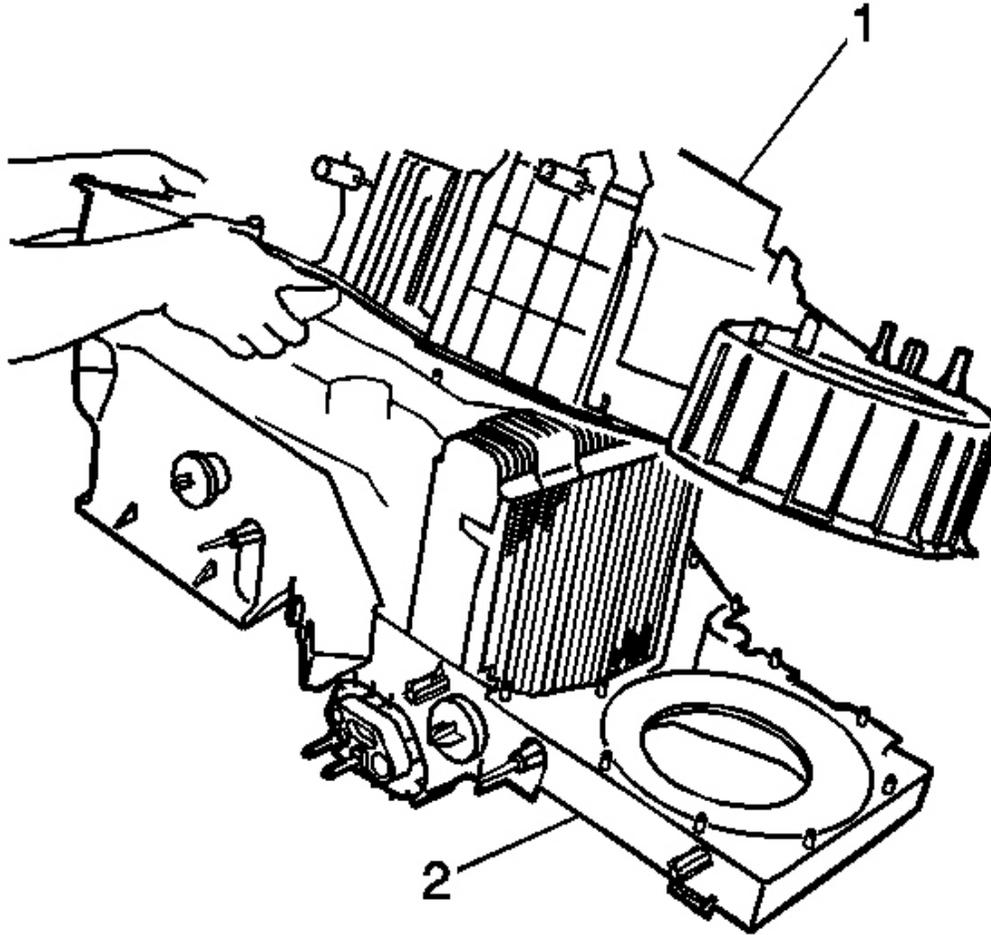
View Of Upper & Lower HVAC Module Assemblies (Delphi)
